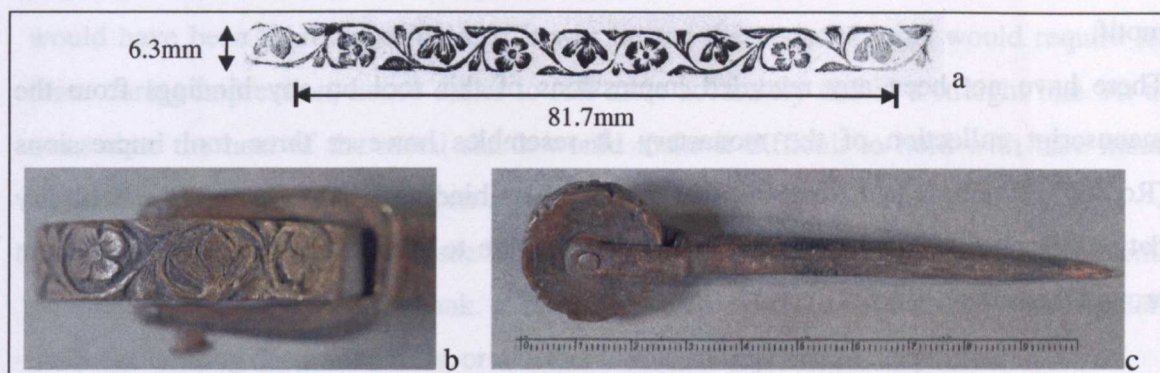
Tool 29: a) actual size smoke proof, b) photograph of wheel, c) side view
